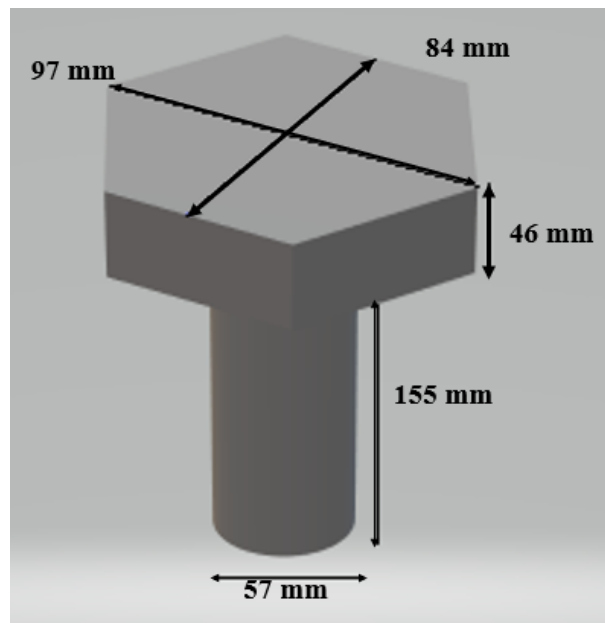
The dimension of the bolt used to make the second tensile specimens
